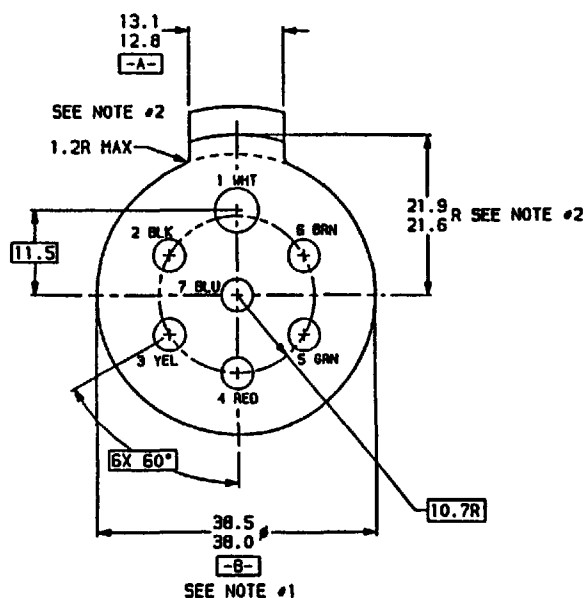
ALTERNATE CONSTRUCTION RECEPTACLE SOCKET
